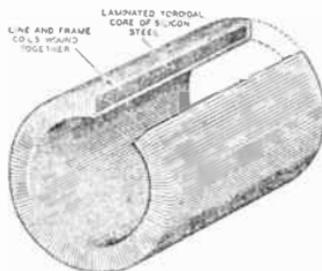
TOROIDAL DEFLECTING-YOKE CUT AWAY TO SHOW LAMINATED STEEL CORE.
